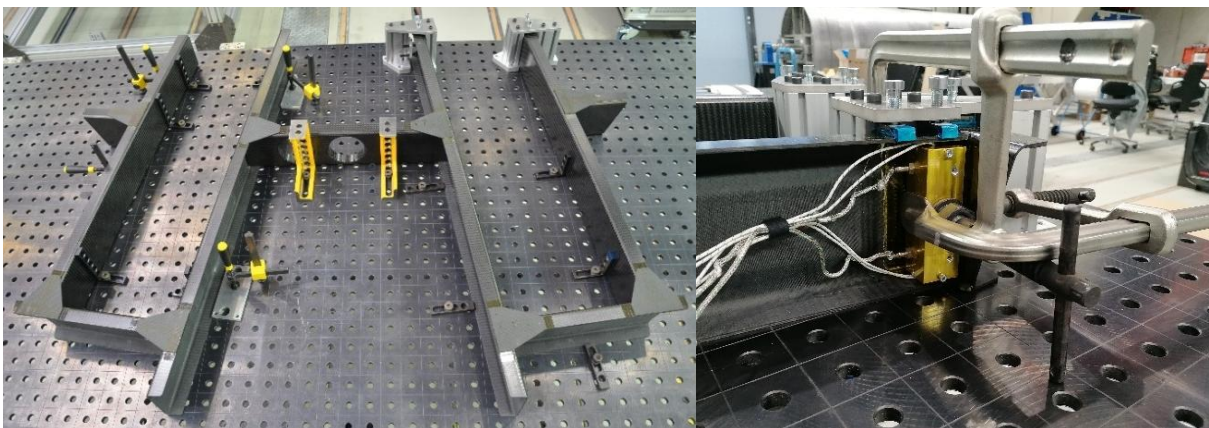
Fixed sub components on welding fixture (left) and AIDJ setup for joining (right)
